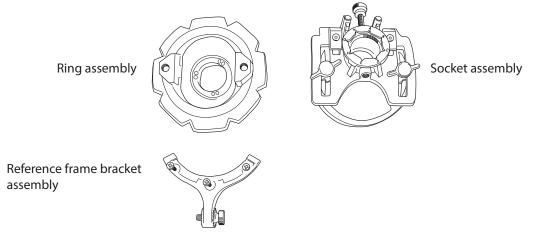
Disassemble the Nexframe tower into the three assemblies.
